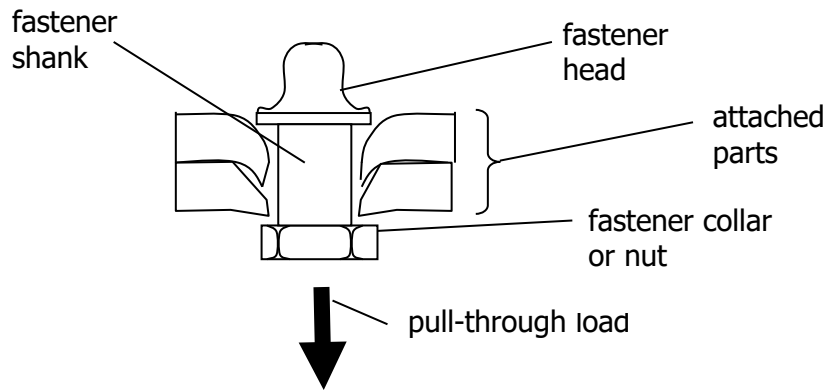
Axial load on fastener pulls fastener through the attached parts
